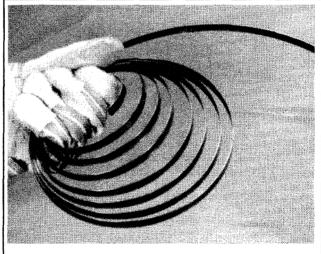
Inspect the spring for wear, damage or corrosion—handle with care
